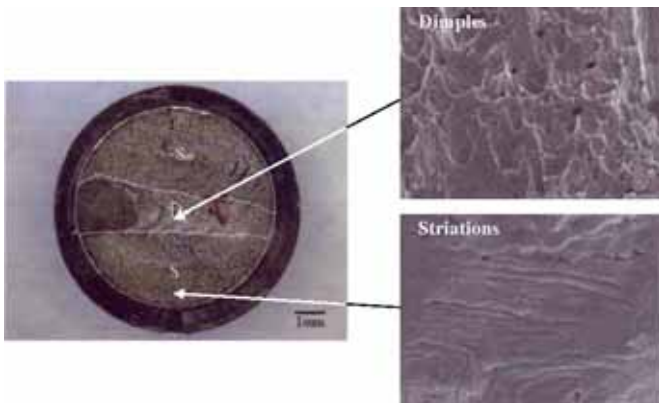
Fracture Surface of Damaged Bolt after Takeuchi, *et al.*³⁾
